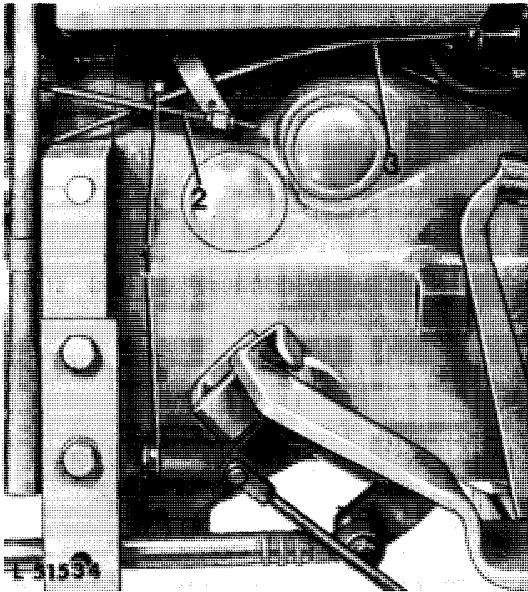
Separating between Engine and Clutch Housing, L.H. Side
